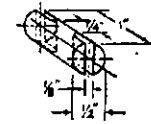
The spacing insulator for the driven element may be made from a piece of rod or sheet of Plexiglas or other good insulating material.
